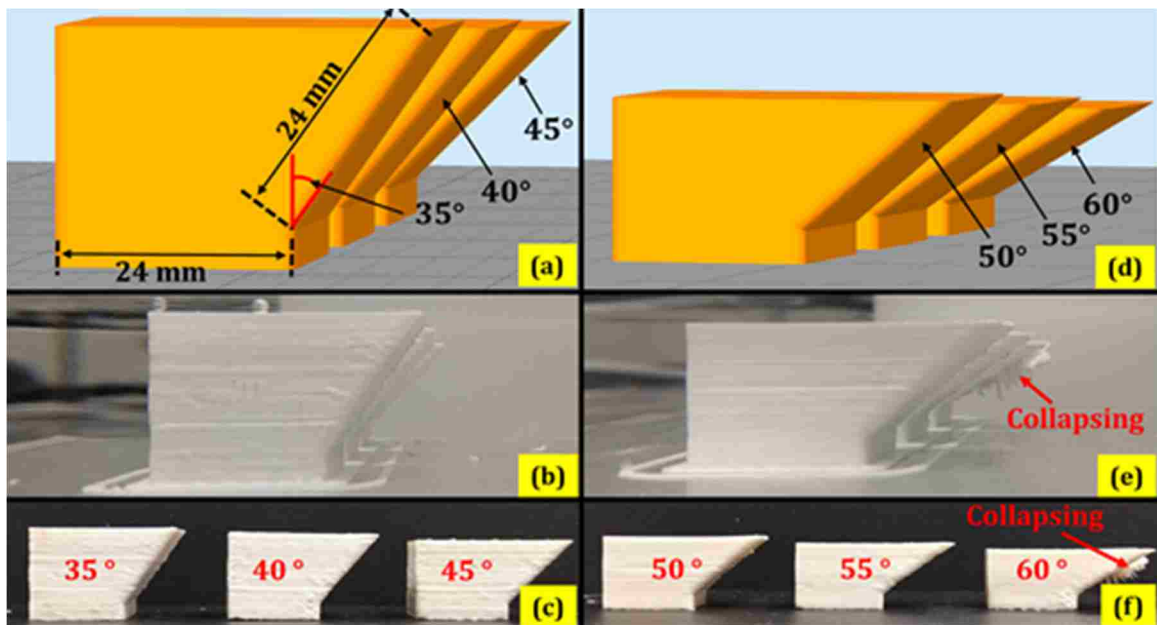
Wedge-shaped test parts: (a)(d) CAD model, (b)(e) As-printed parts surrounded by oil, (c)(f) As-sintered parts.
